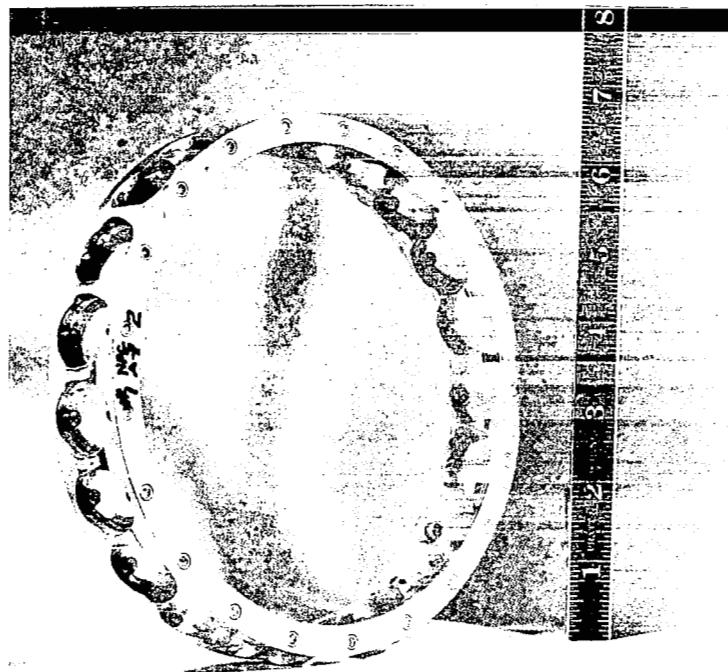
Overall View of Cage – Drilled-Ball Bearing S/N 2600A-1
